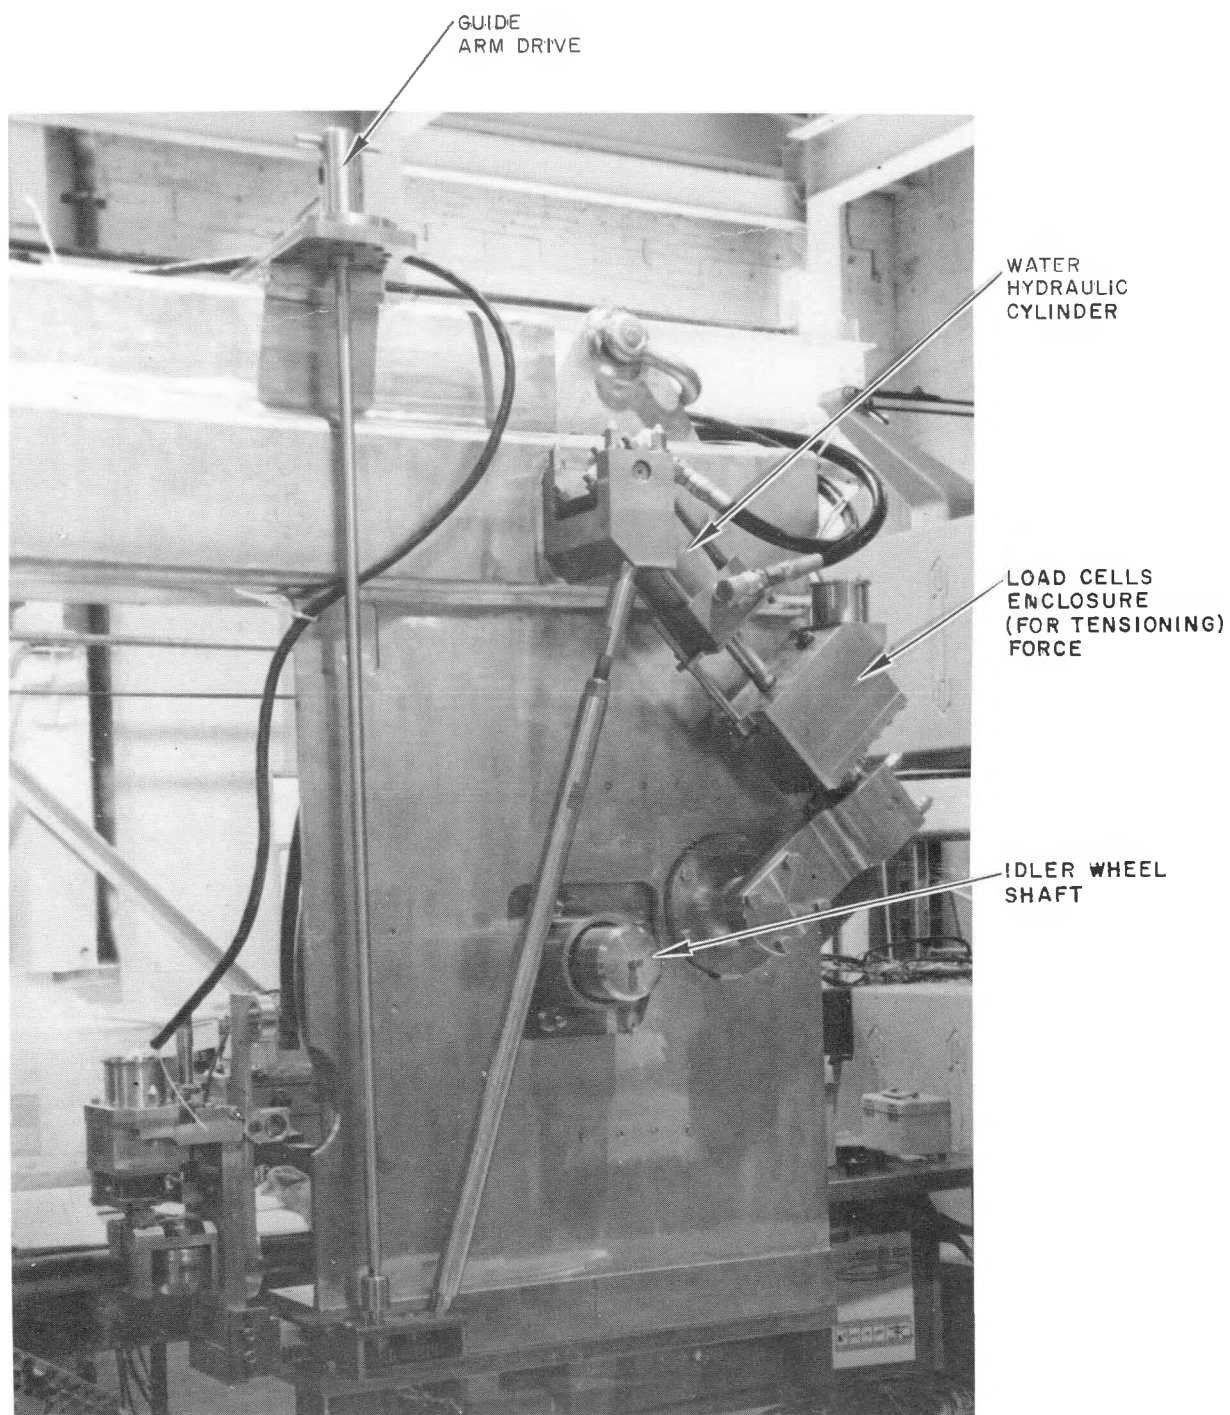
MDA-COS Bandsaw Tensioning System Assembly
